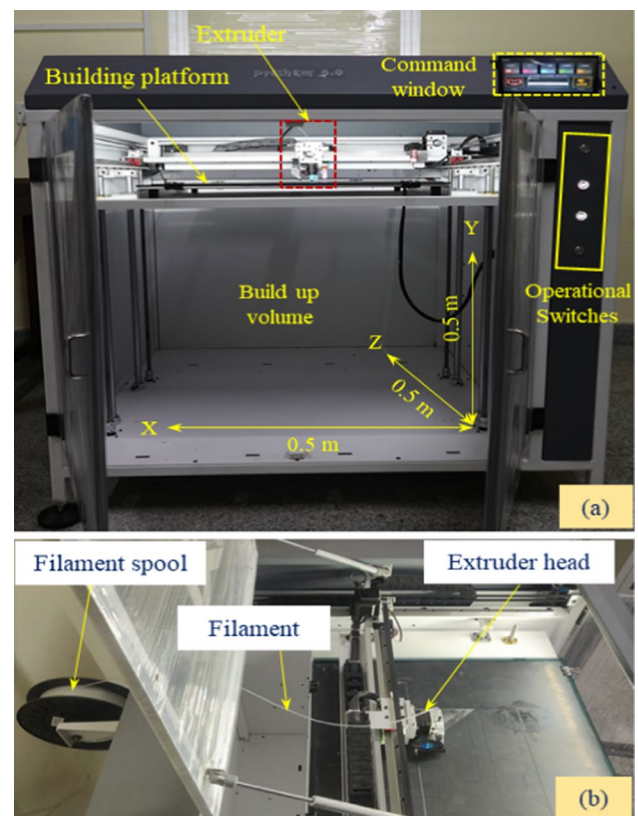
FDM printer a major components; b printing mechanism
